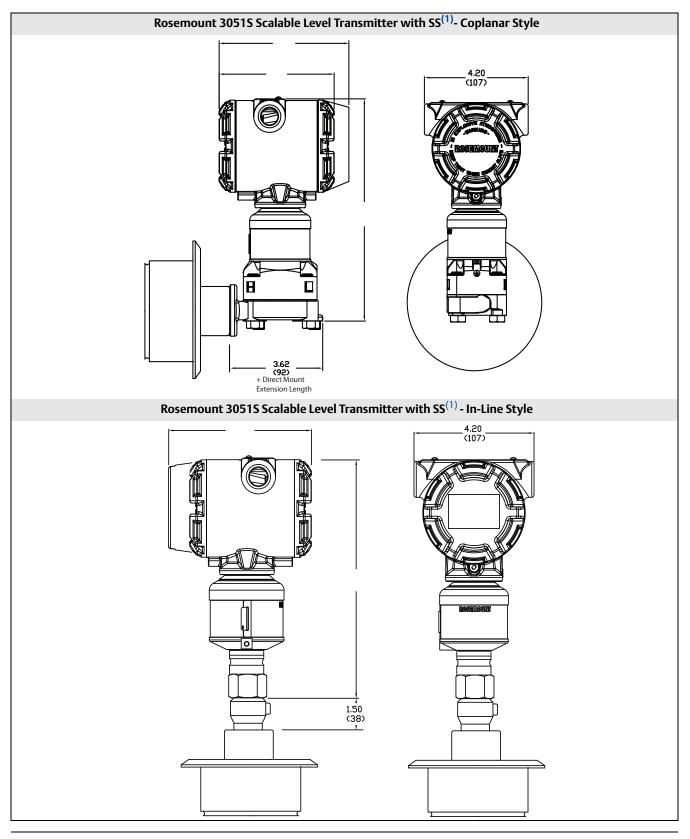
Rosemount 3051S Scalable Level Transmitter with SS Seal (Measurement in inches (millimeters))
